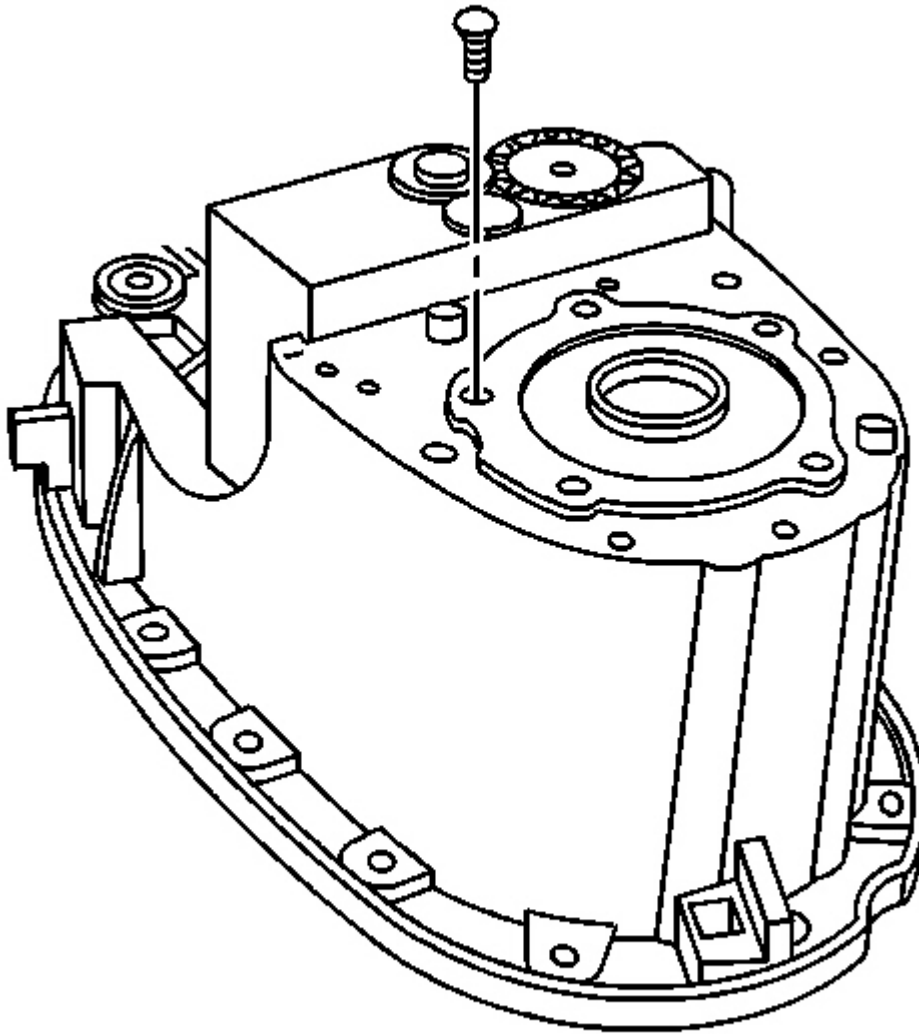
Identifying Clutch Lever In Rear Case
